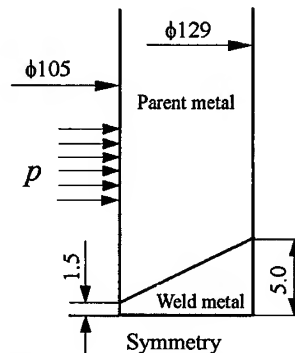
Geometry of HK-40 reformer furnace tube with weldment
